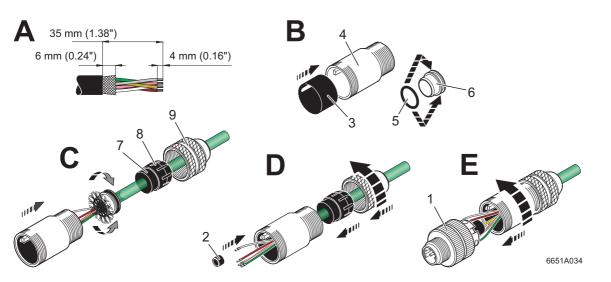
Cable assembly using the example of a shielded INTERBUS cable
